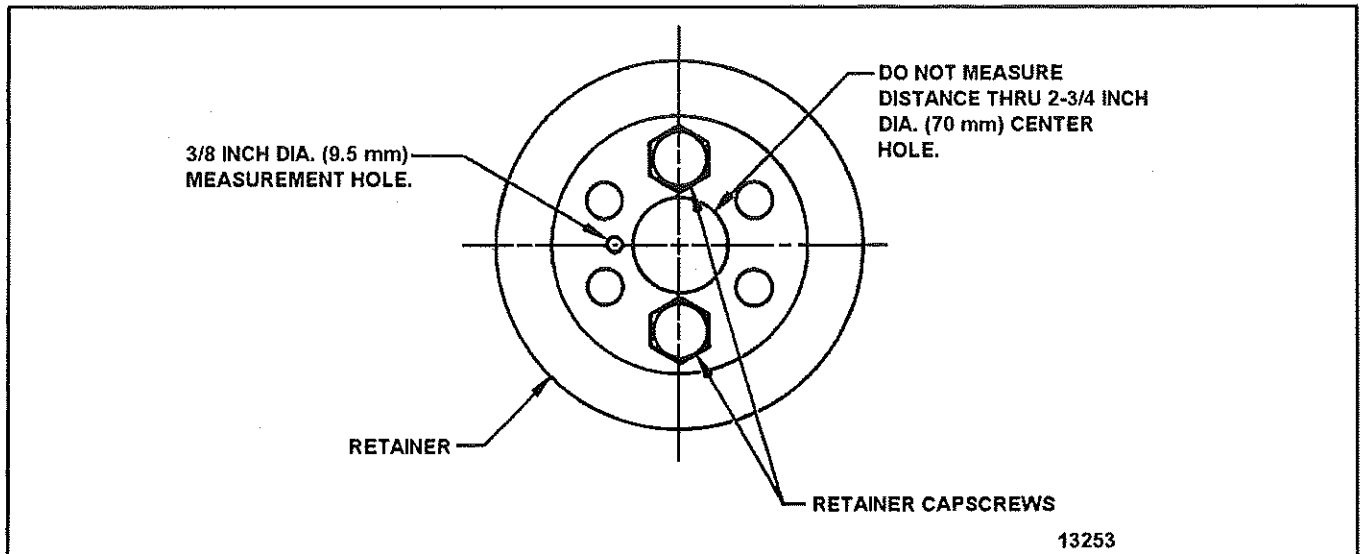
FRONT WHEEL BEARING RETAINERS
